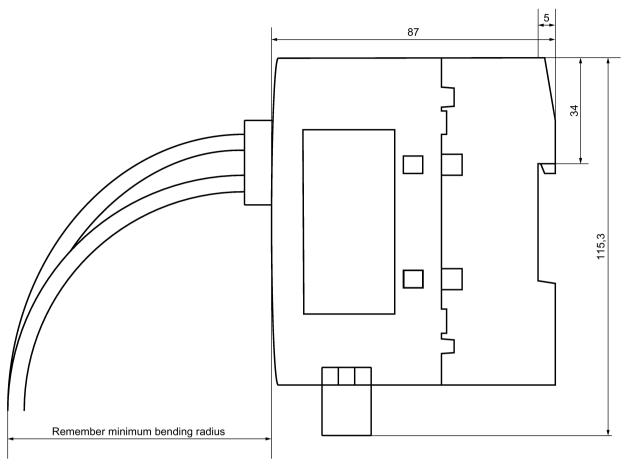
Dimension drawing, side view (example: SCALANCE XB004-1)
